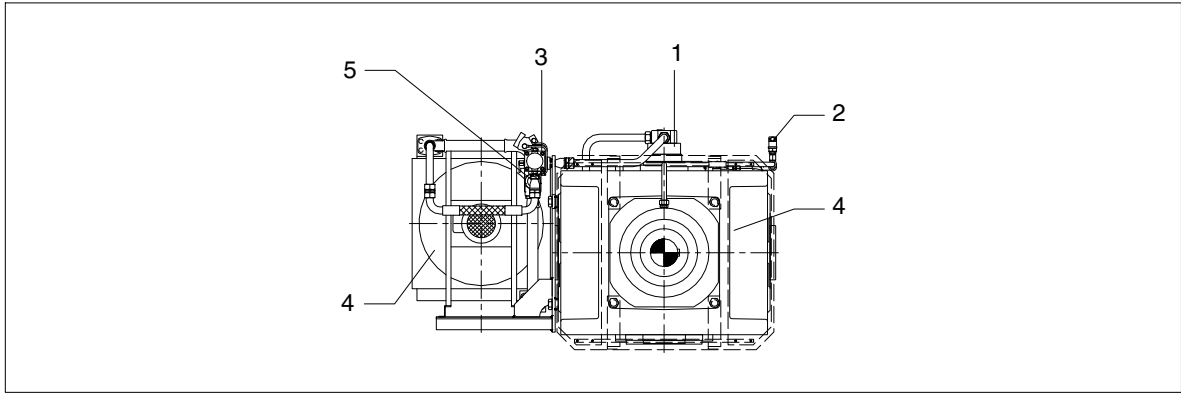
Add-on oil-supply system with air oil-cooler on gear units type B..V
